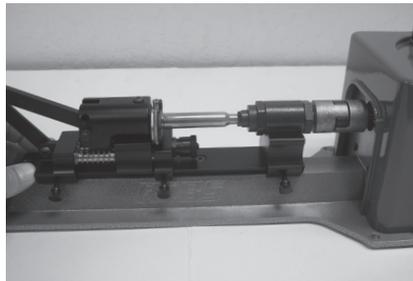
Slide Shell Holder Carrier Assembly to Cutter Shaft
